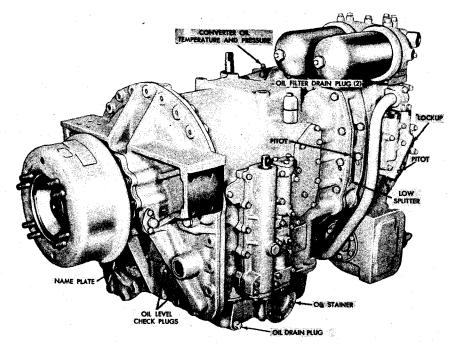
Oil system check points (straight-through model)—right-rear view
